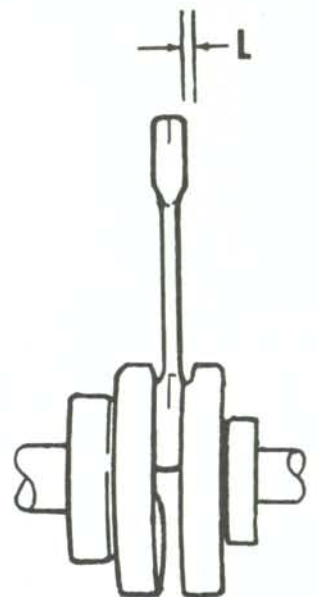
Axial play of connecting rod is determined by moving connecting rod small end laterally. Axial play (L) should be 0.006-0.016 in.
